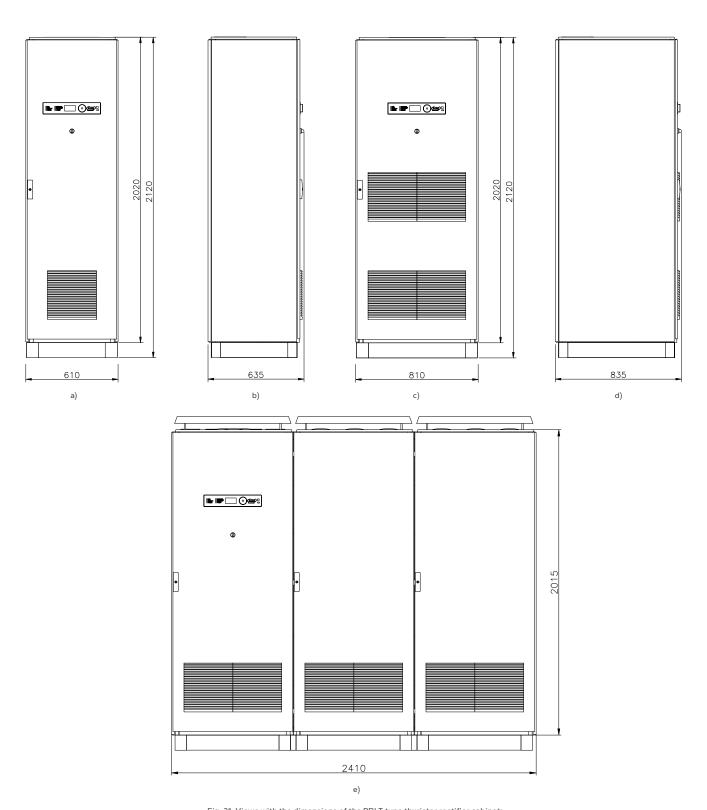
Views with the dimensions of the PBI T type thyristor rectifier cabinet:
